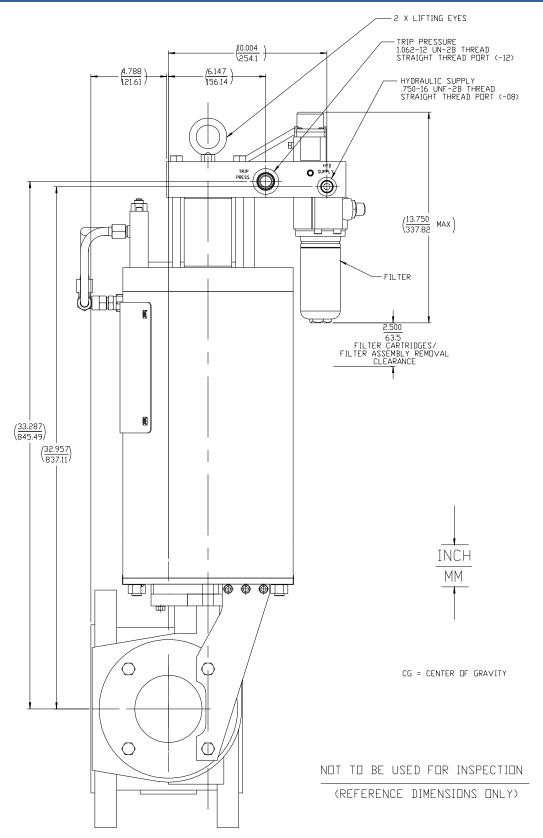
Gas Stop/Ratio Valve Outline Drawing (8-inch, with 2 LVDTs)
